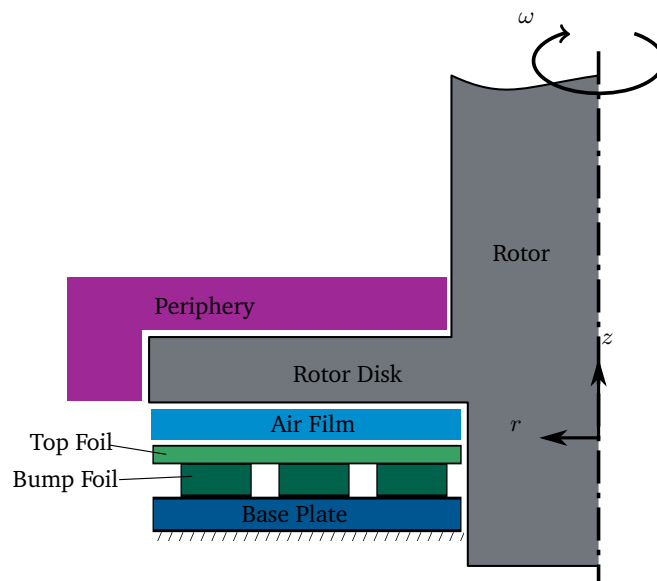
Rotor bearing system of an air foil thrust bearing.
